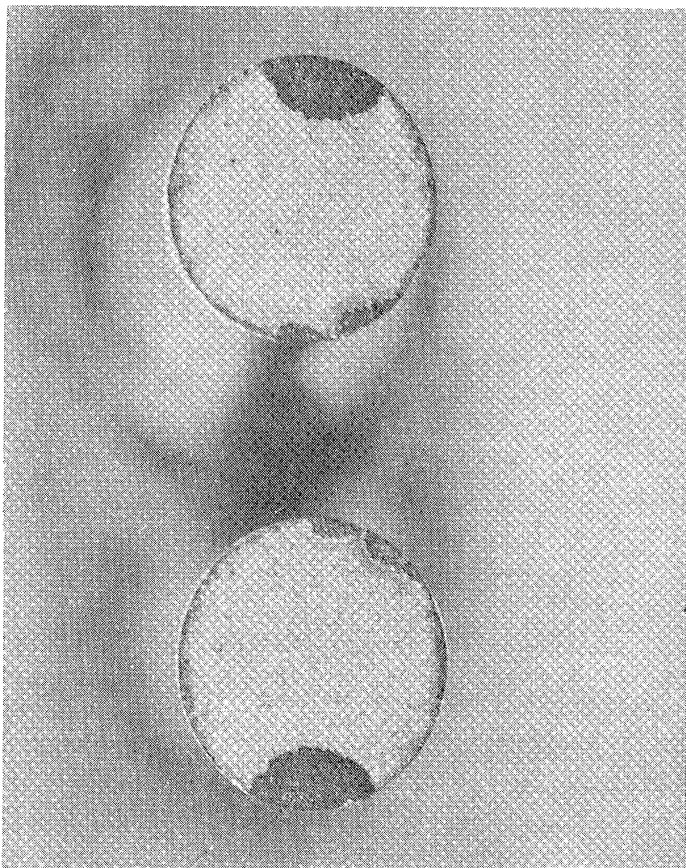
Specimen R-63 (Oxidized Areas on Fracture Surface)
